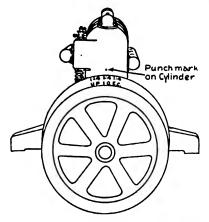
SHOWING MARKS ON CYLINDER AND ON FLYWHEEL
